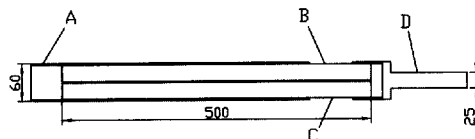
Schematic of a soil core sampler : A. outer cylinder, B.&C. inner cylinder, D. driving head.
